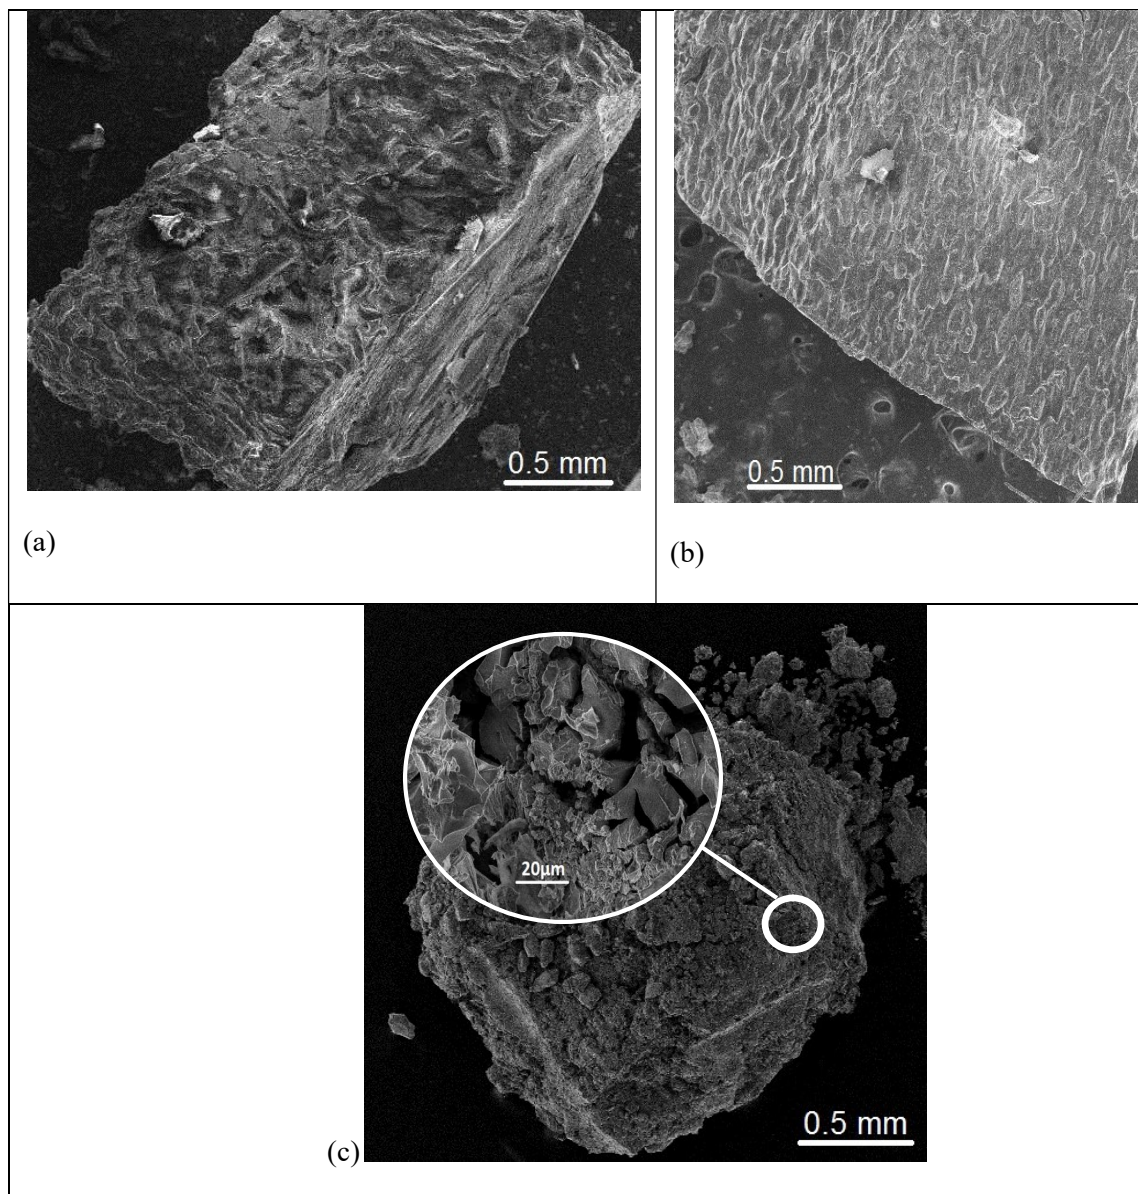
Fracture surfaces from expanding ring tests of compacts made from 100 μm powder: (a) 18.8 mm; (b) 12.7 mm; (c) no core. Note the interfacial cracking on these surfaces that are indicative of brittle failure, specifically in the high magnification inset of the fragment from the compact swaged with no core.
